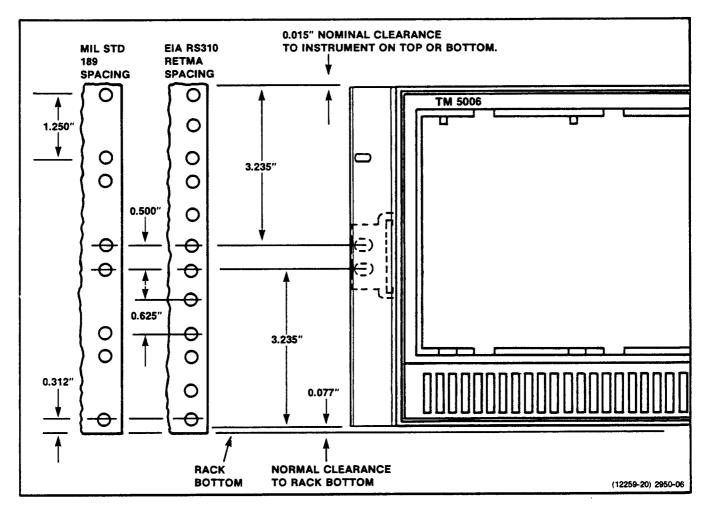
Dimensions and positioning of TM 5006, Option 10, in standard rack.
